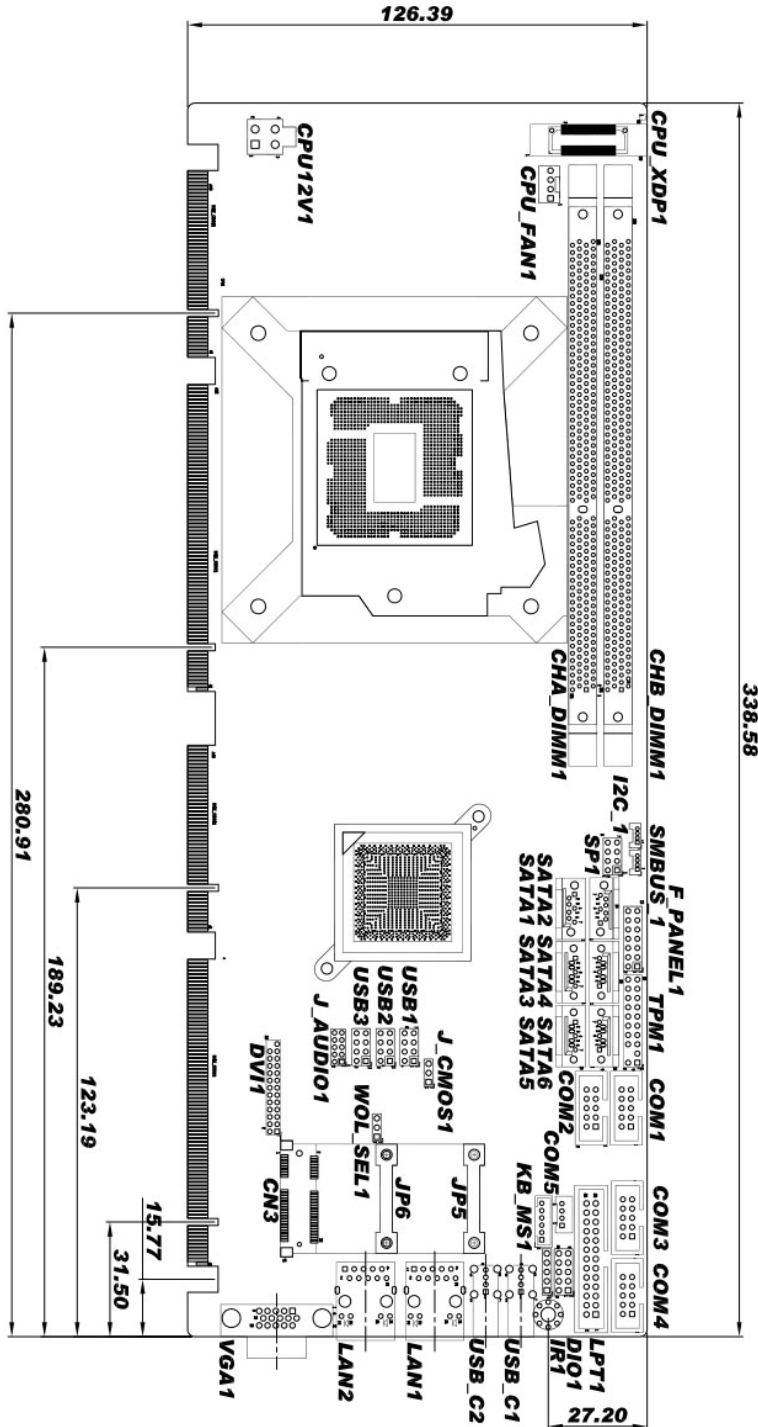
SPCIE-C2160 Dimensions (mm)
